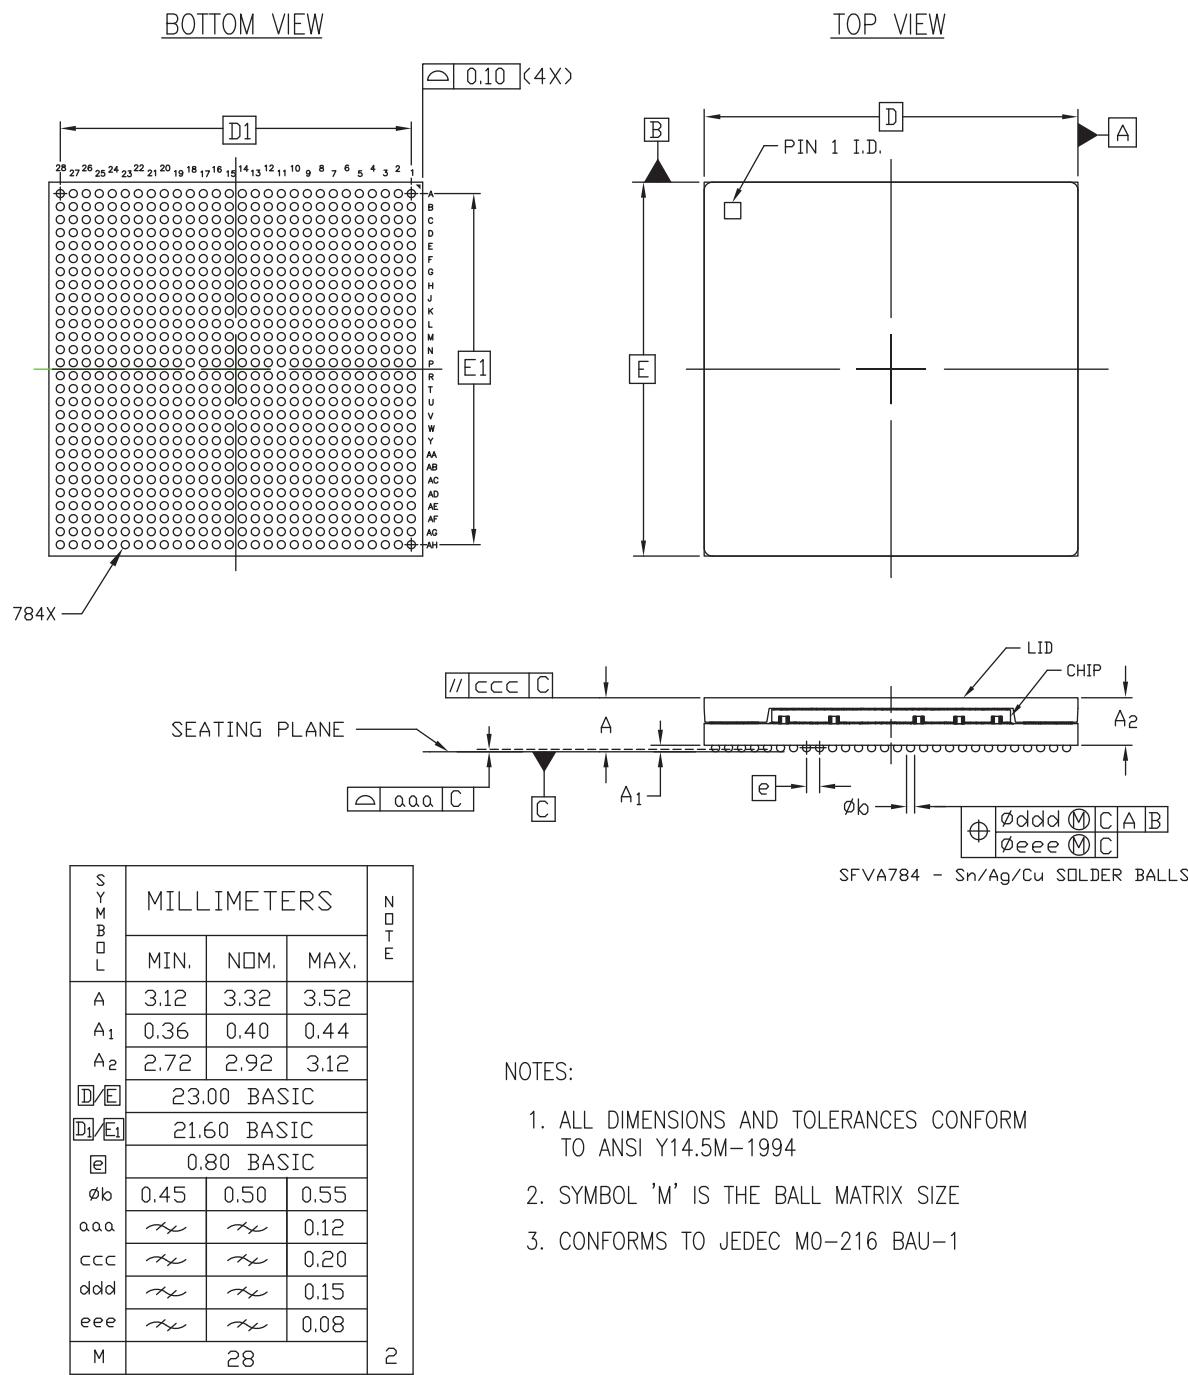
Package Dimensions for SFVA794 (XCKU035 and XCKU040)
